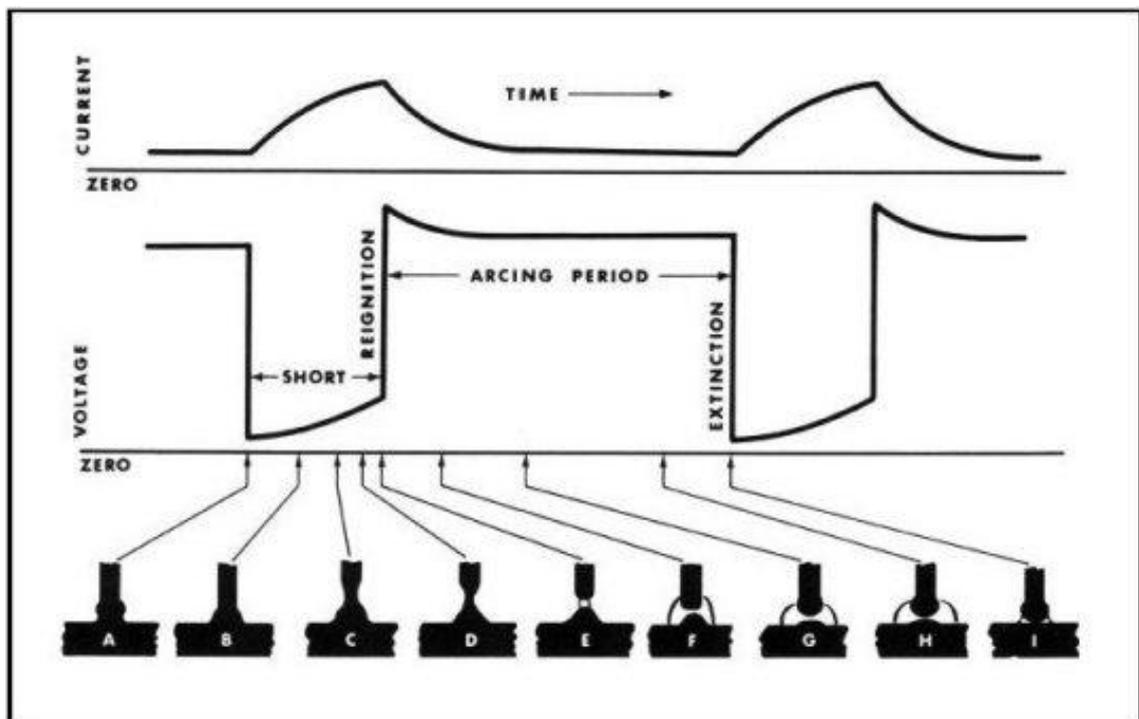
Short circuiting cycle in short arc welding (ESAB, 2015a).
